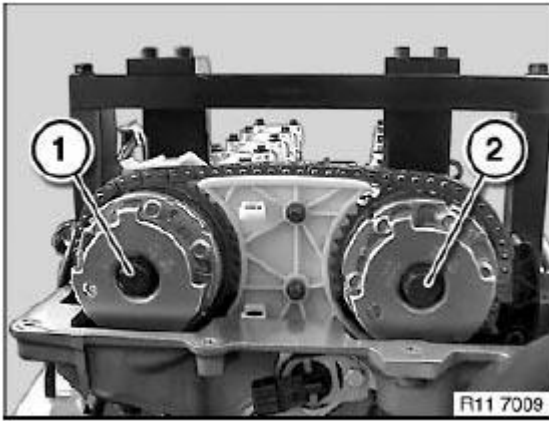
Identifying Inlet And Exhaust Camshaft Central Bolt
